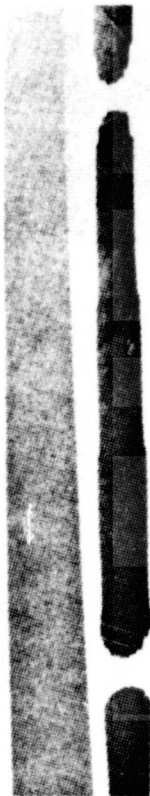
Section AM-AM of Blade 4. Top Piece Shown Has Core Removed.
